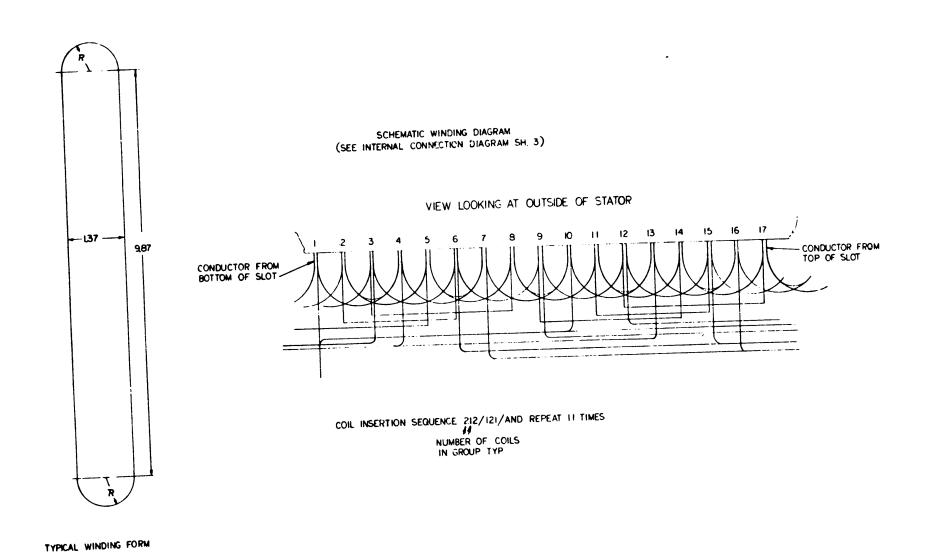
Stator Winding and Coil Connection (400 Hz) (Sheet 2 of 2)
